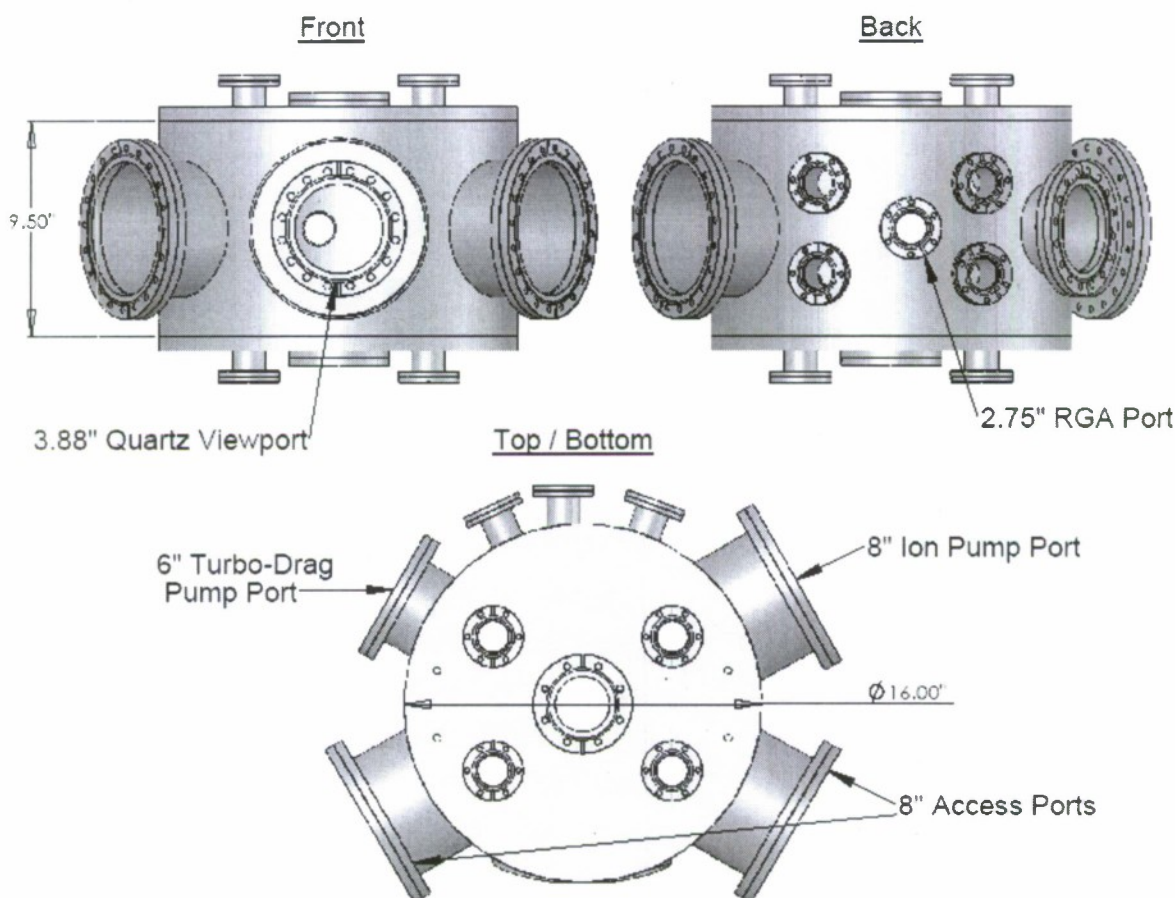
Vacuum Chamber. The twelve unlabelled 2.75" ports are used for vacuum gauges, valves and instrumentation feed-throughs.
